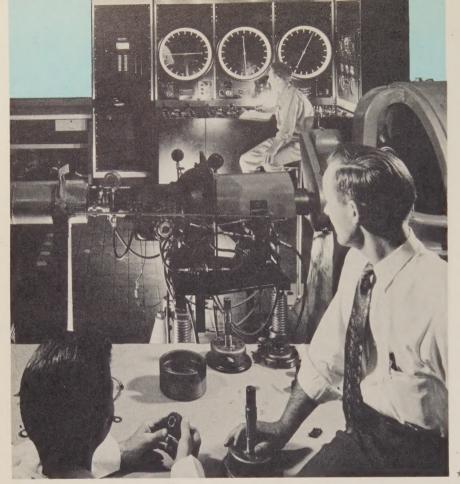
Fundamental gear studies have long been a part of the Staff's Engineering Mechanics Department and have played an important part in the development of today's high load-carrying gear designs.
